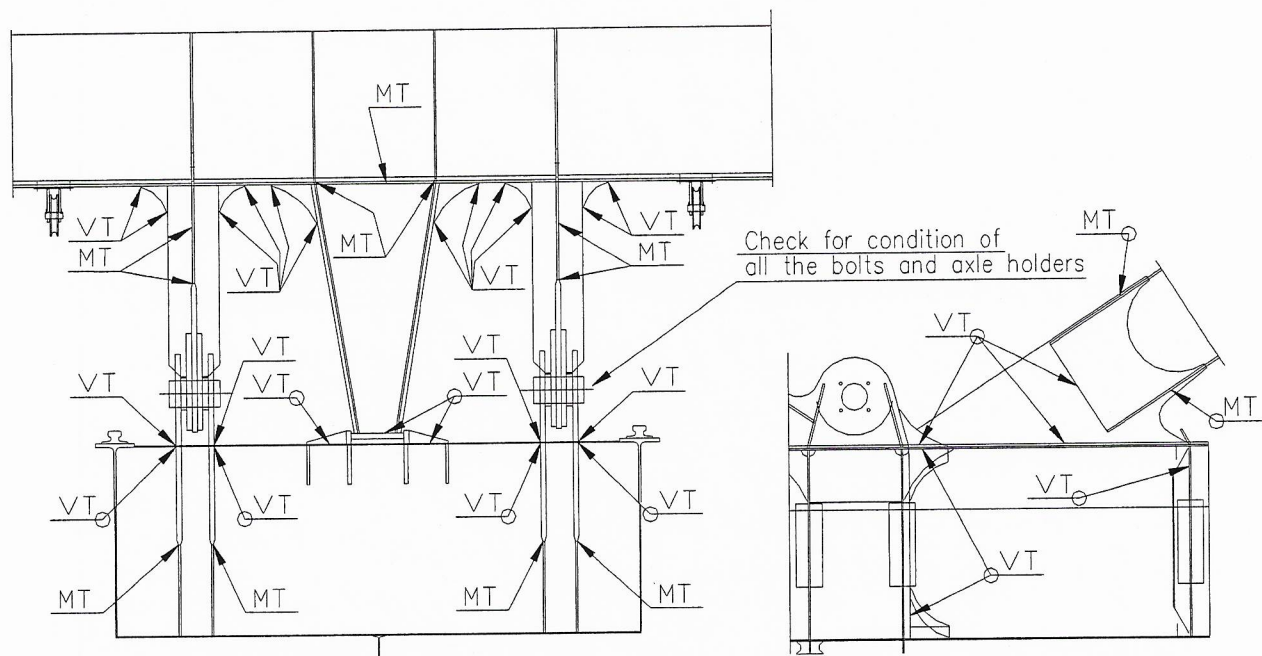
Joints of Back Shoulder Beam and Support Beam
